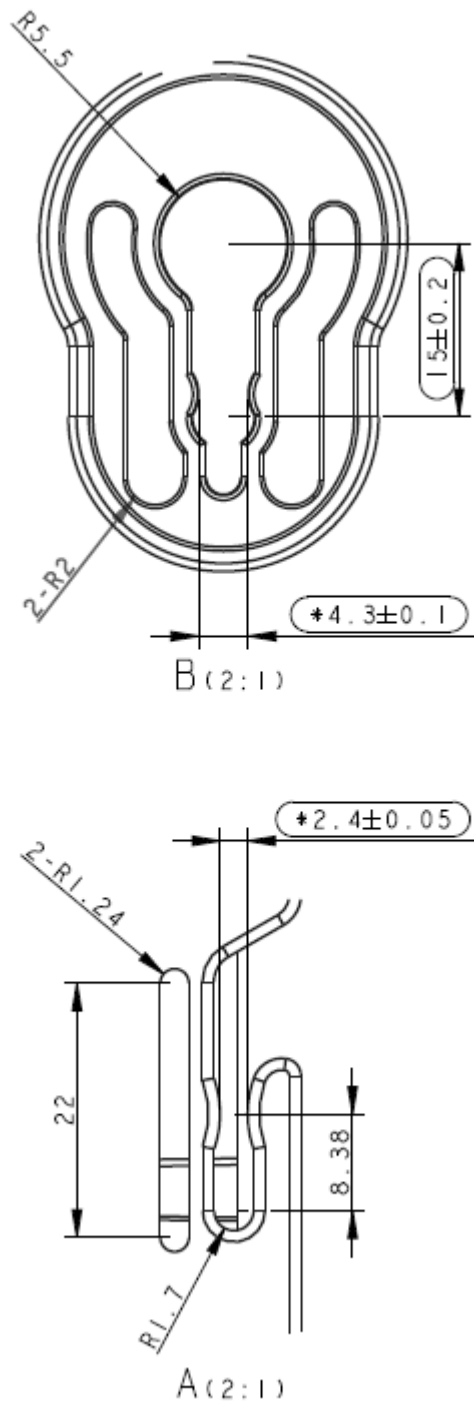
MiTAC E8020 Capri Dimension (A detail)
